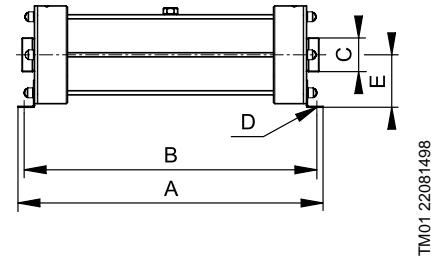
Dimensions of pulsation damper, sizes 750 and 2500
